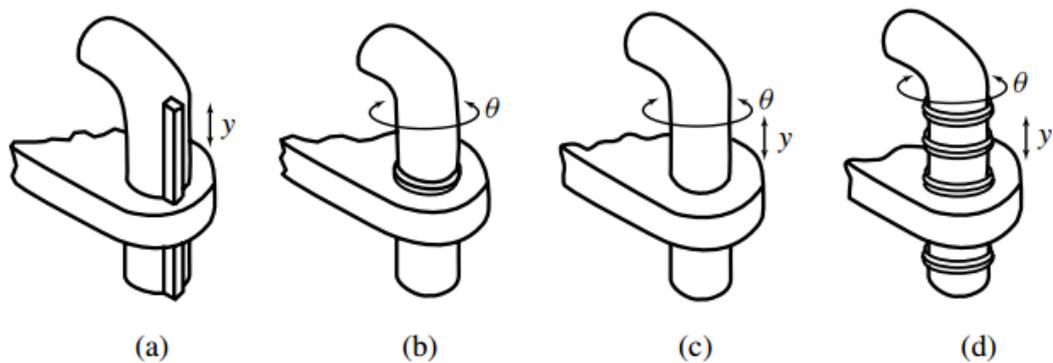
Examples of mechanical Joints: a) Prismatic joint b) Revolute joint, c) Cylindrical Joint d) Screw Joint. [2]
